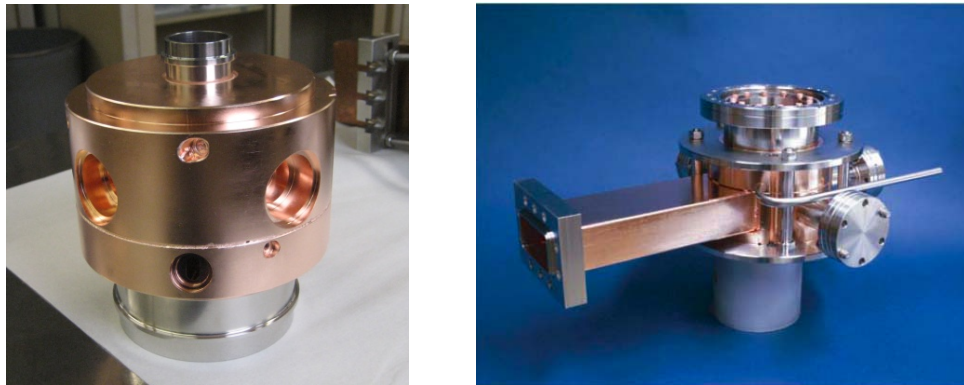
The FERMI gun after first braze, showing open vacuum ports; (right) FINDER gun previous to installation.
